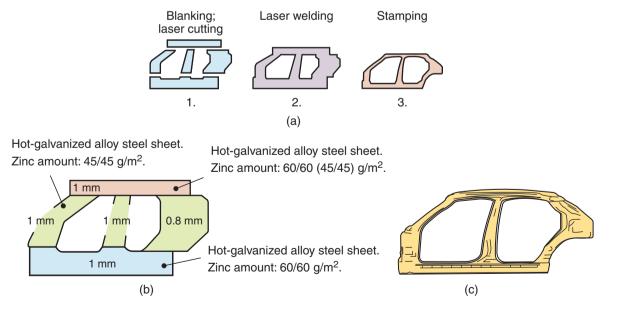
Production of an outer side panel of a car body by laser butt welding and stamping. The thickness of each section is as indicated. *Source:* After M. Geiger and T. Nakagawa.
